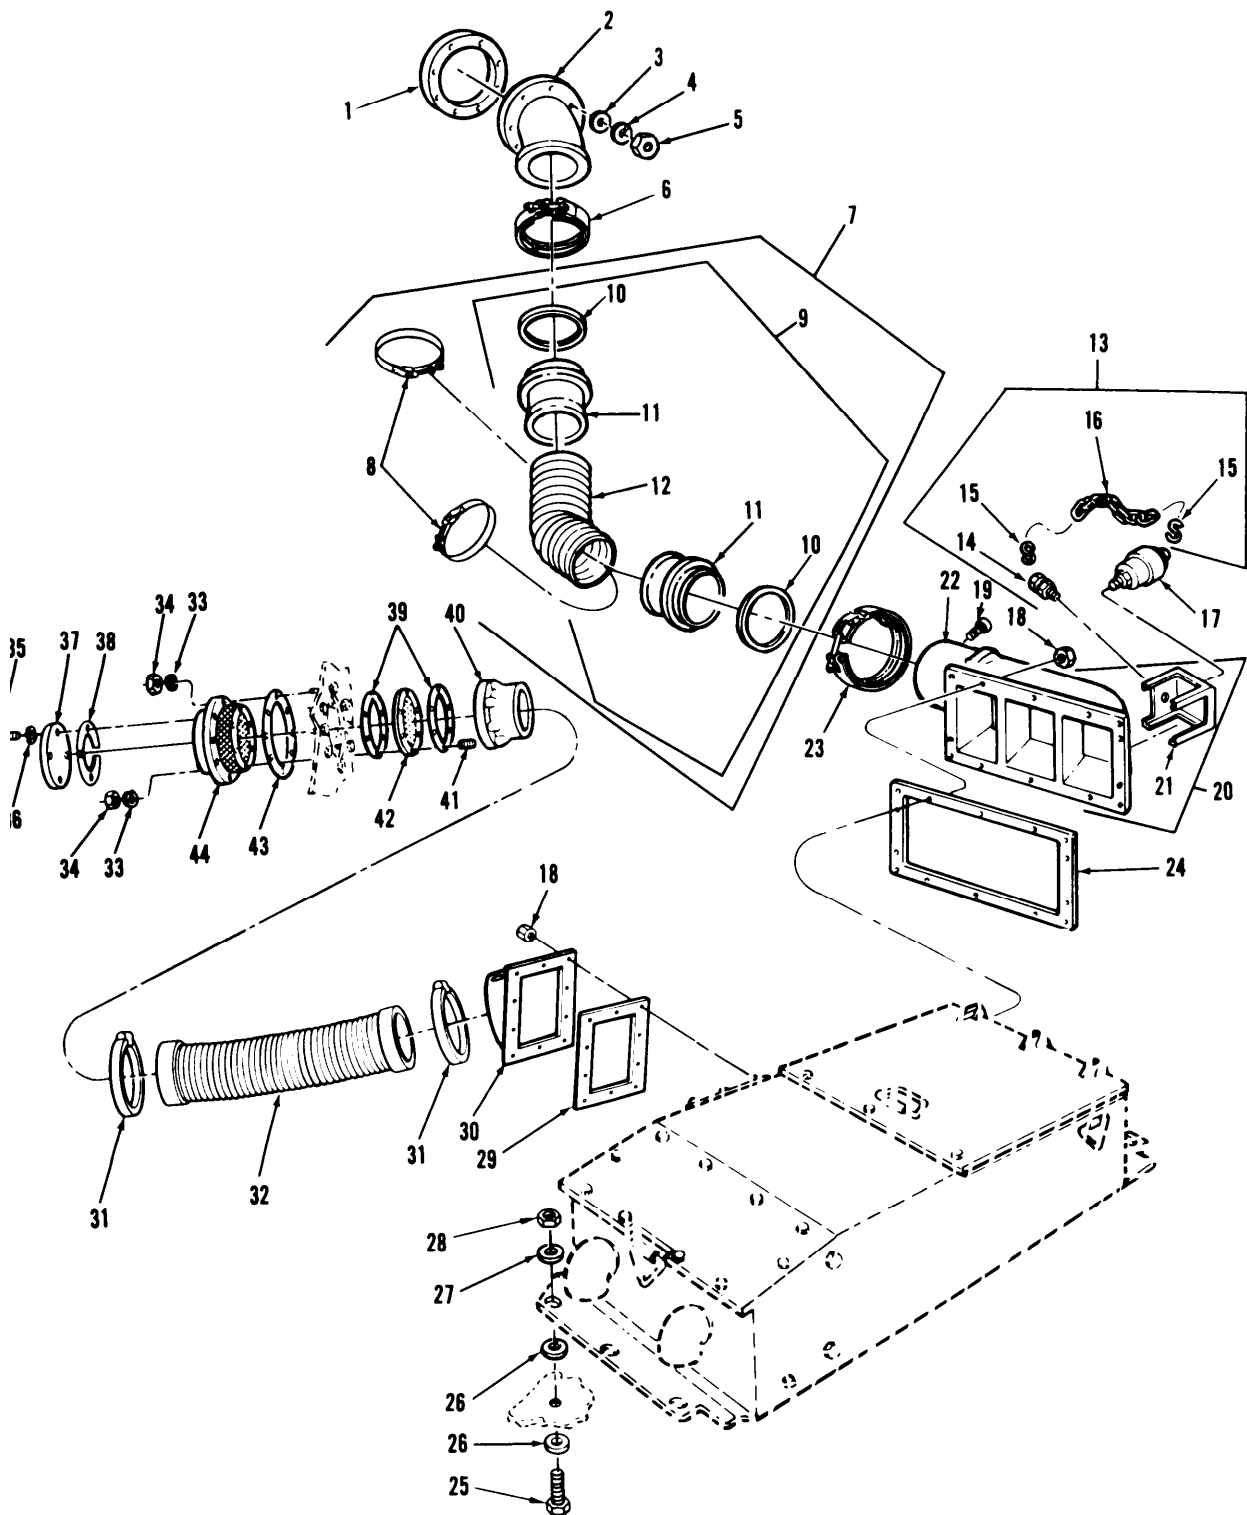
AIR CLEANER HOSE ASSEMBLIES AND RELATED PARTS (2C AND 2D ENGINES).
